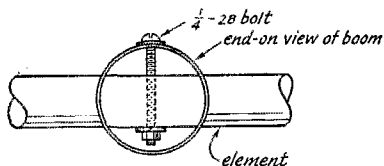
The center element section is held in the boom with a 1/4-28 machine screw, nut and lock washer. The guy wire attaches to the head of the bolt.
